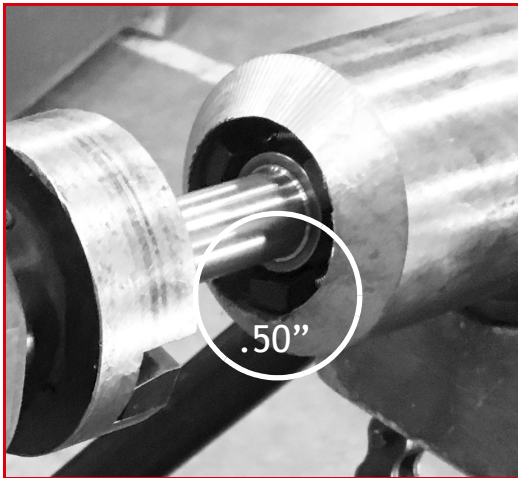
BG44 INSTALLED IN WORKPIECE
